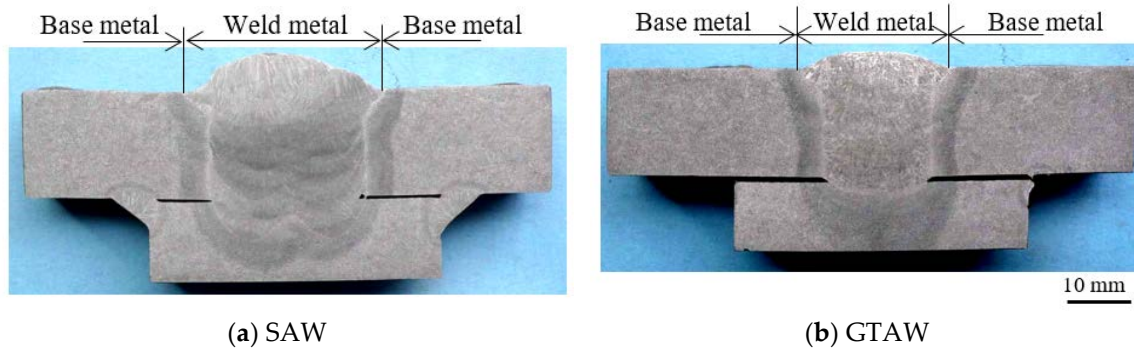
Macrostructures of cross-sections of submerged arc welding (SAW) (a) and gas tungsten arc welding (GTAW) (b) weld joints.
